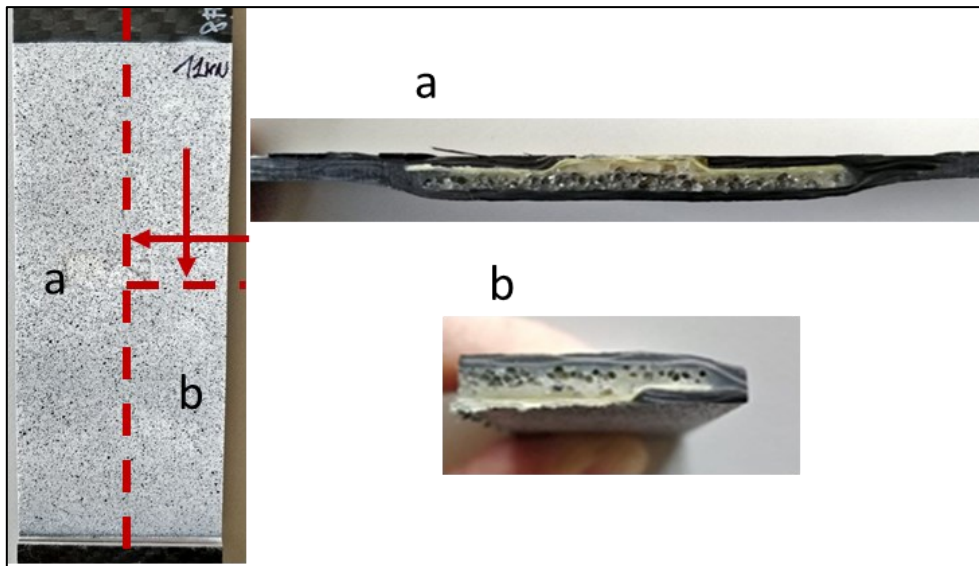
Example of the sample tested at 11kN, a) longitudinal section, b) cross-section
